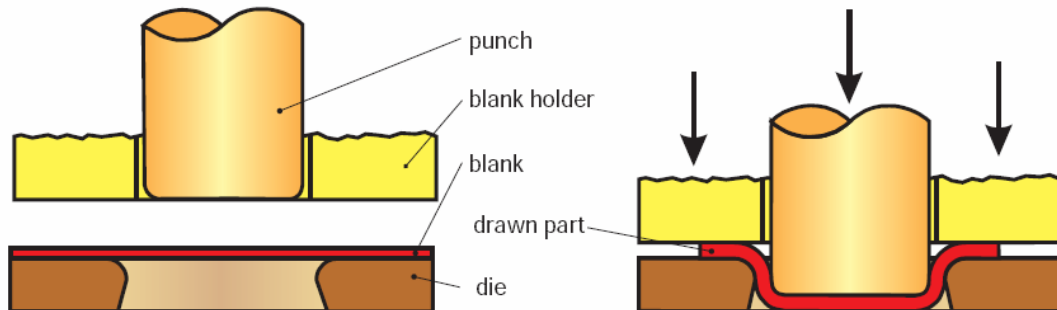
Single-draw deep drawing with blank holder (Schuler Metal Forming Handbook, 1998)
